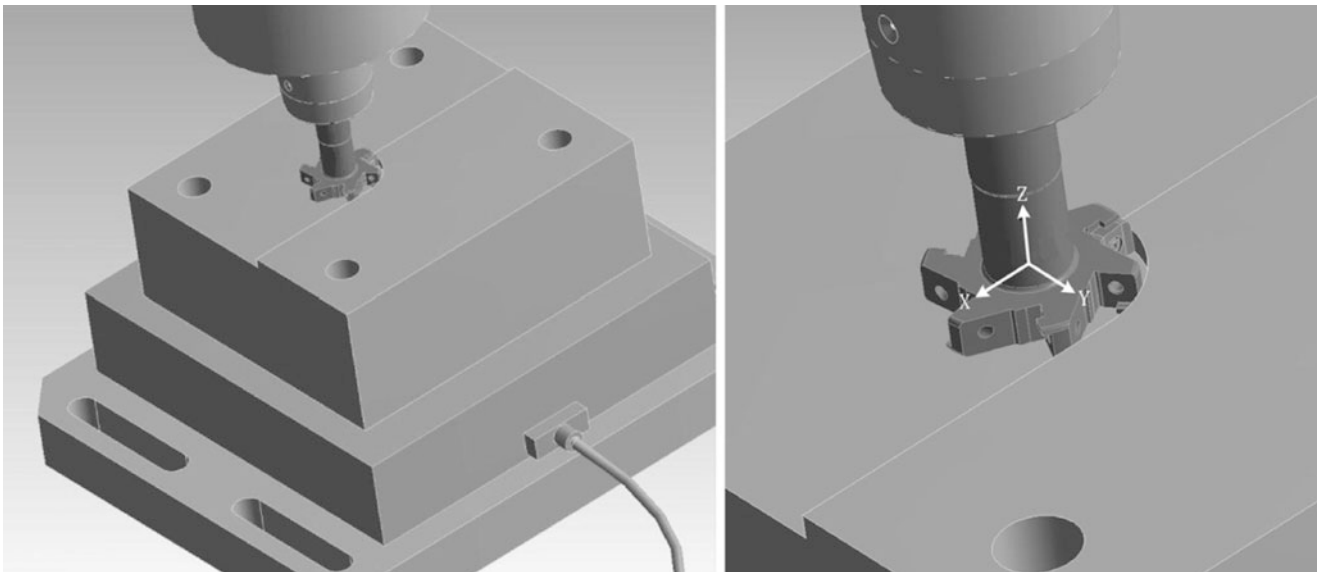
The test setup showing force dynamometer, workpiece and cutter used in the measurements
